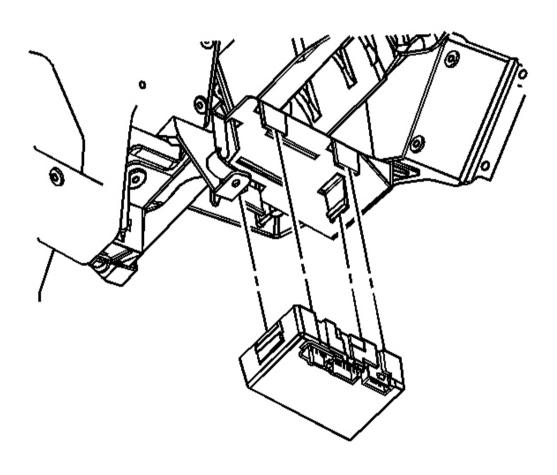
Transfer Case Shift Control Module Courtesy of GENERAL MOTORS CORP.
